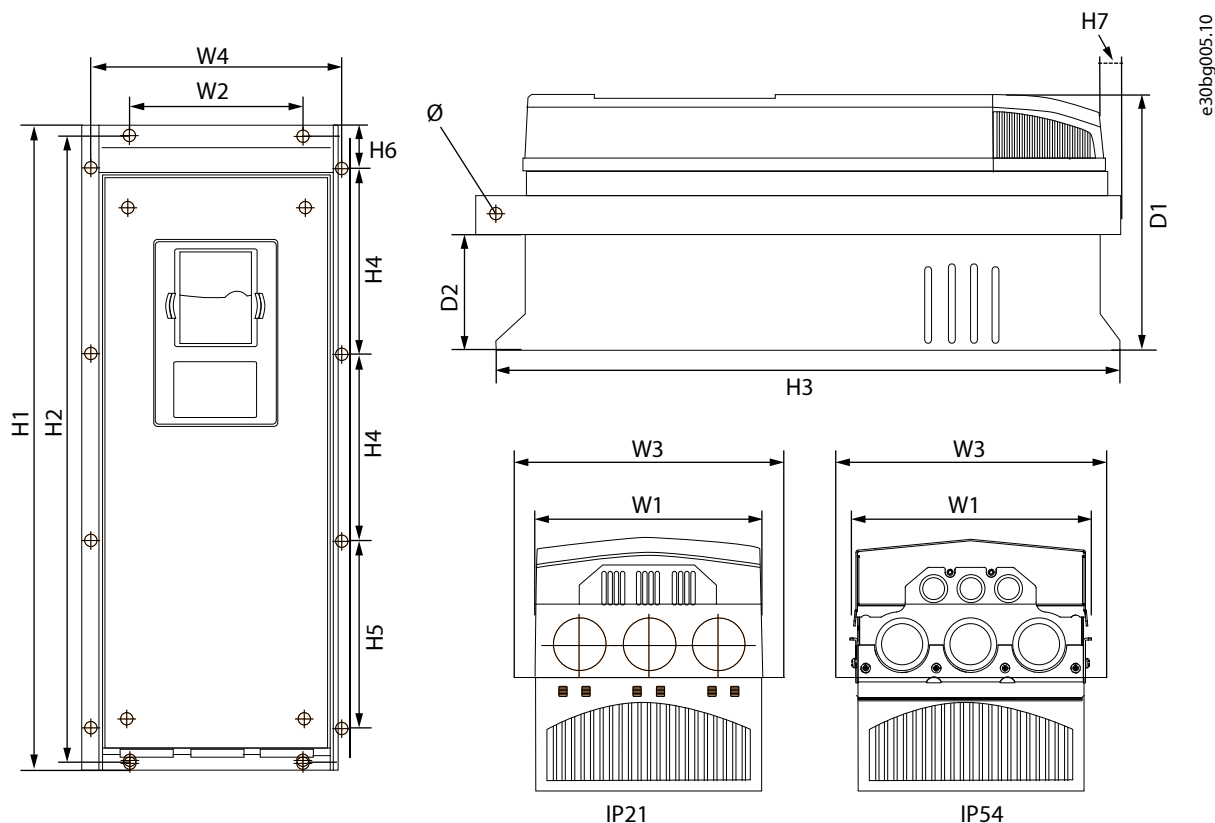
Dimensions of the VACON® NX Inverters with Flange, FI7 and FI8
